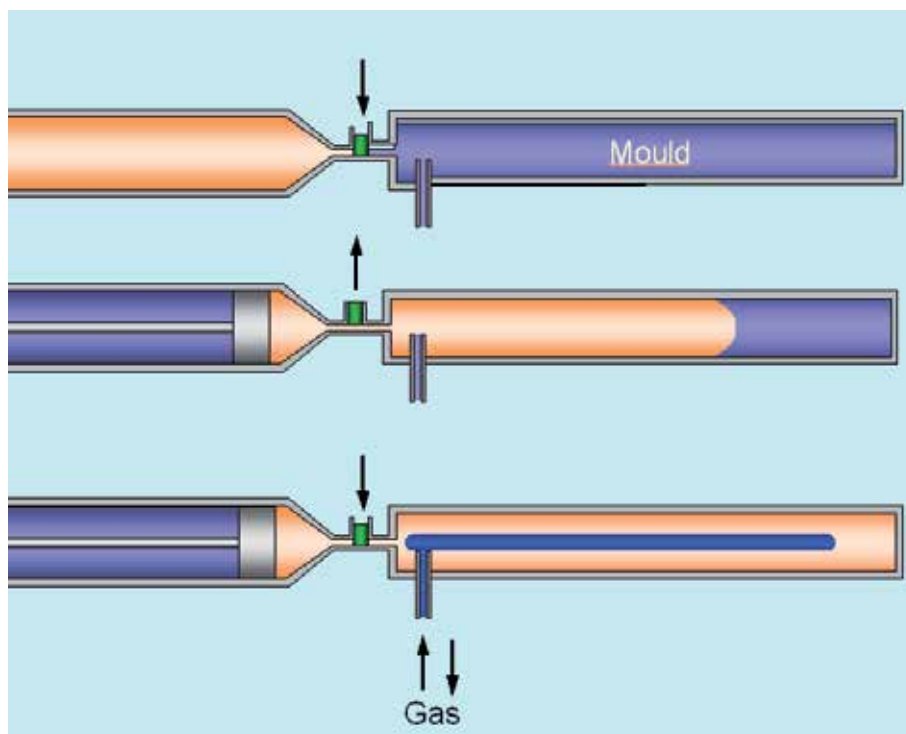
Principle of gas-assisted injection molding (acc. to www.cinpres.net)
